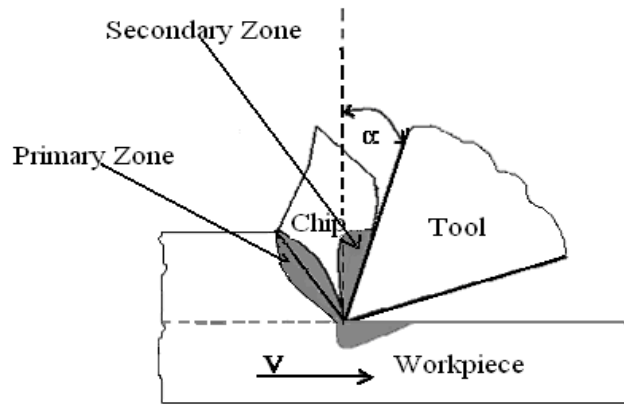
Illustration of how Material ahead of the Tool is sheared
